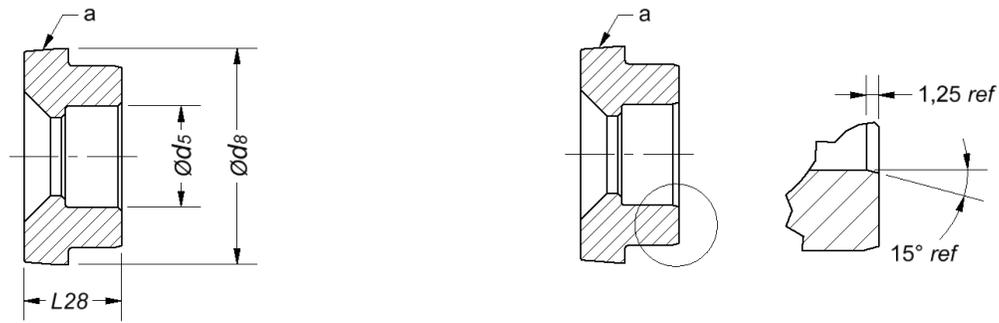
B - DIMENSIONS OF BRAZE-ON SLEEVE – STYLE B
